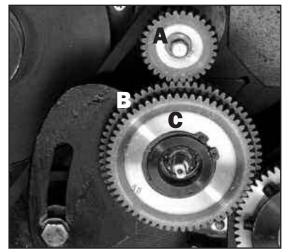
Make certain that your gears are properly set-up to obtain the desired thread pitch
